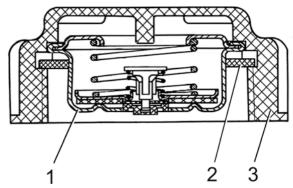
Expansion tank plug: 1 – valve block; 2 – gasket; 3 – body
